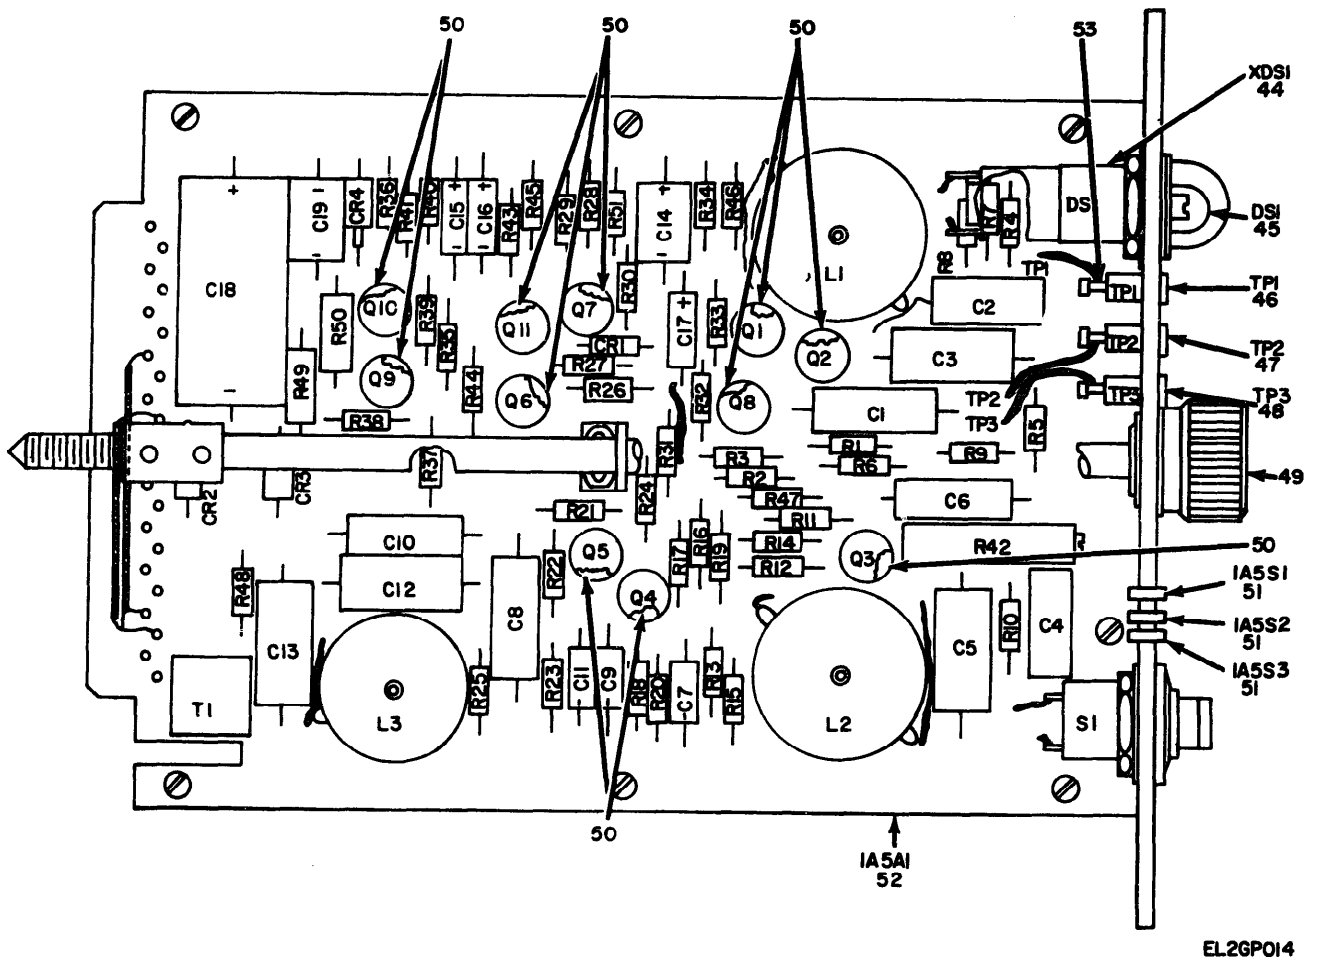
Ring Receive Module Assembly IA5, Ring Receive Subassembly 1A5A1.
